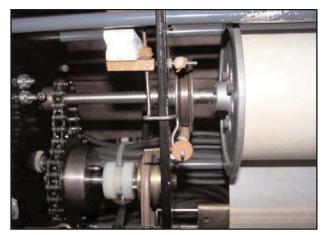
A close-up of the spool frame shows the upper roll brake and the roll tensioning pneumatic.
